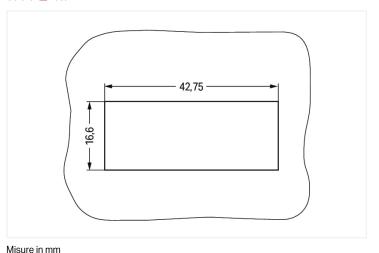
Plate thickness: 0.5 ... 2 mm Cutout tolerance: + 0.1 mm
